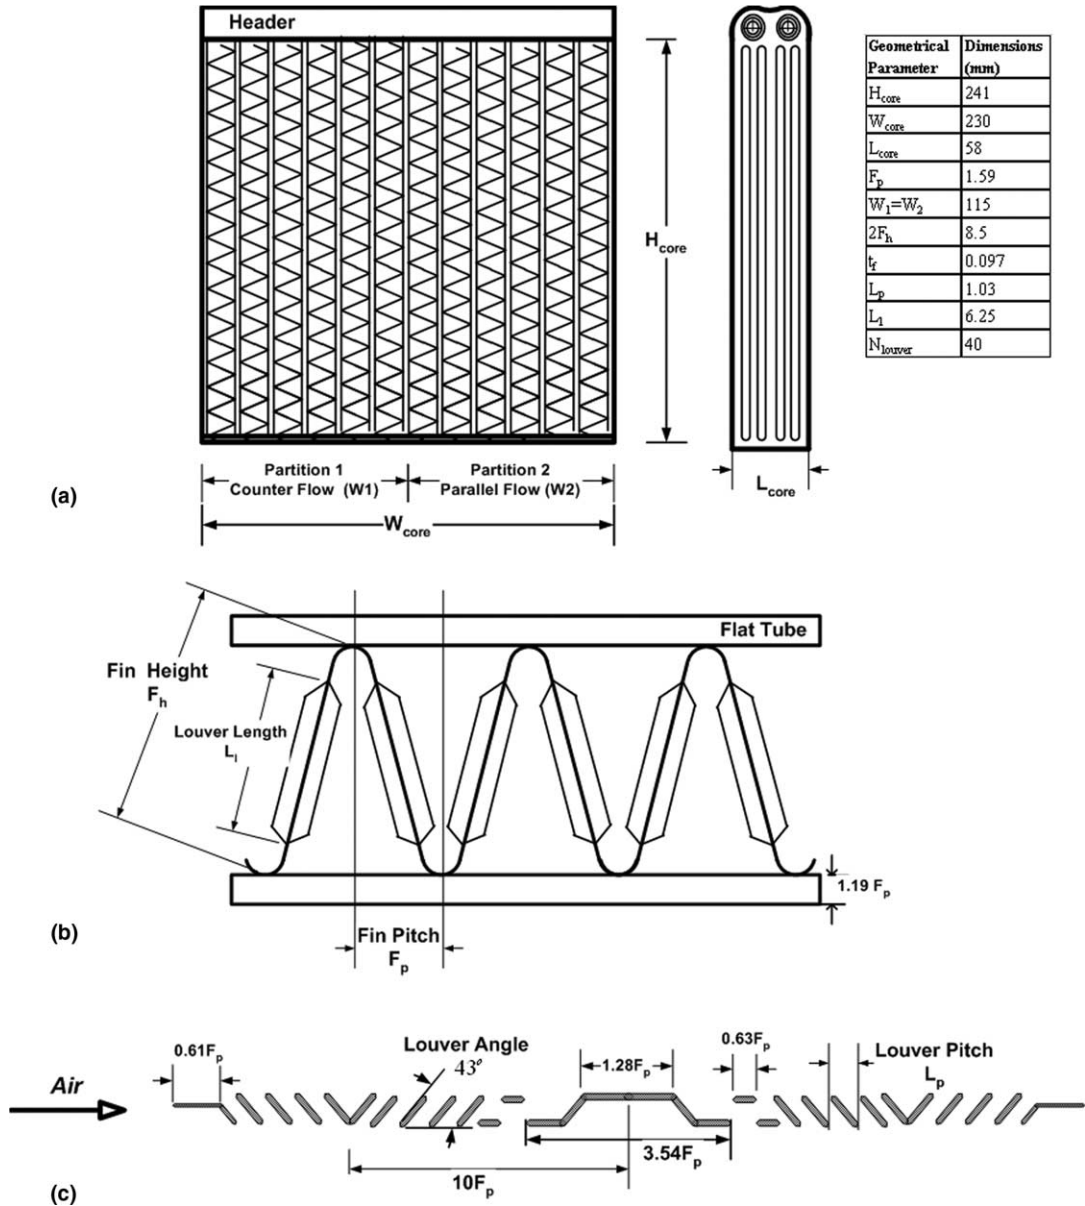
Schematic diagram of the flat tube louvered compact heat exchanger tested: (a) the frontal and side views showing both partitions, (b) view of fin and louver from air exit side, and (c) Louver fin cross-sectional drawing.
